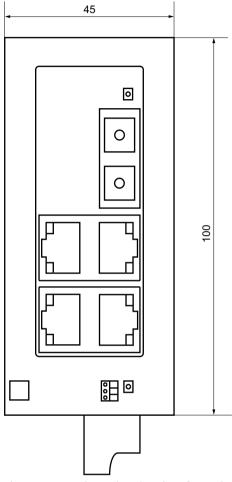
Dimension drawing, front view (example: SCALANCE XB004-1)
